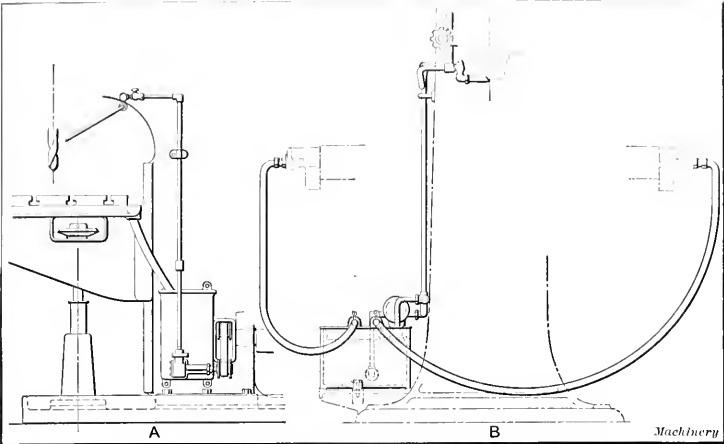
A, Lubricating System for Drilling Machine; B, Supply and Return System of Vertical Milling Machine
